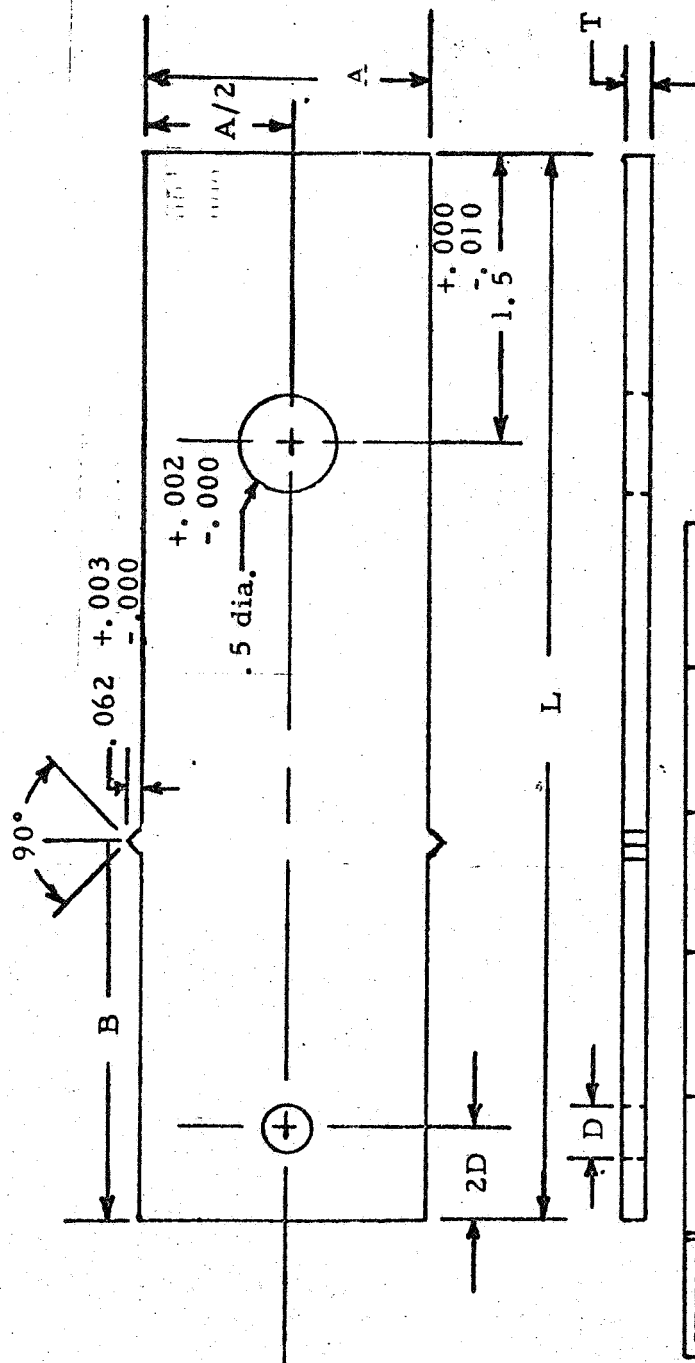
Beryllium Lap Joint Specimen for Protruding Head Bolts.
